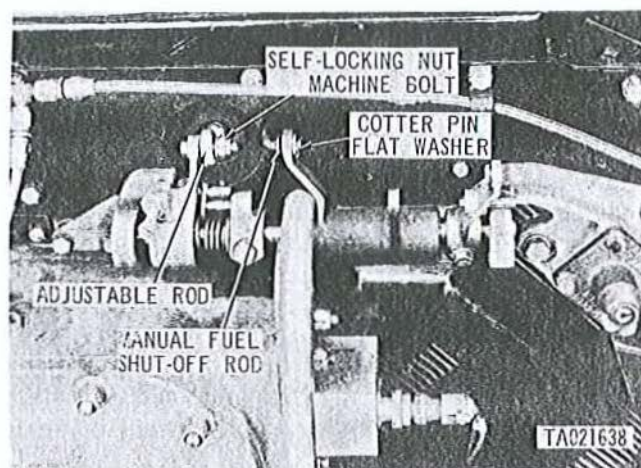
Disconnecting or connecting manual fuel shut-off rod and adjustable throttle rod.
